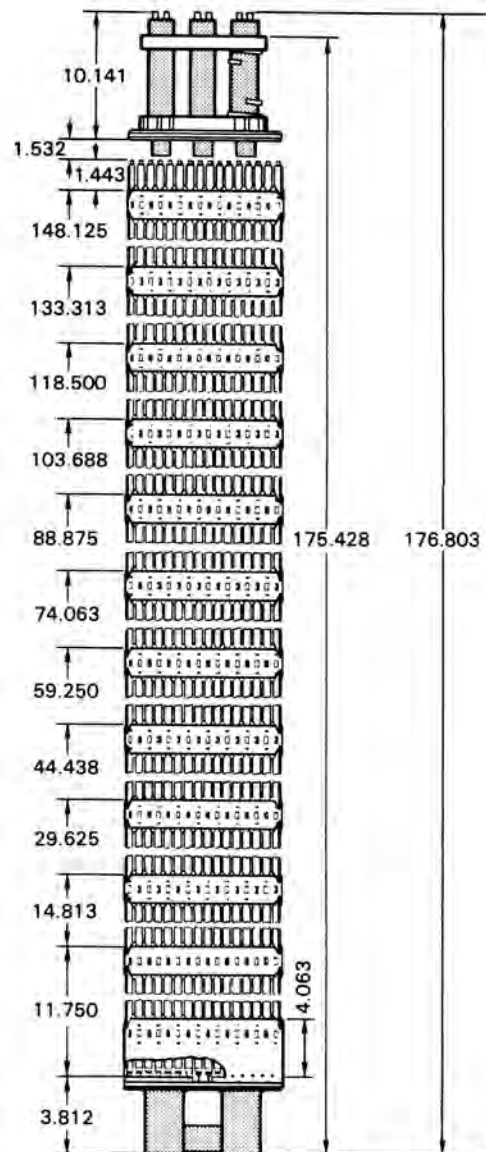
Combustion Engineering Fuel Assembly, ANO-11 16 x 16.
